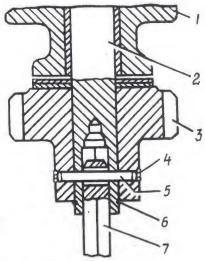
OIL PUMP AND IGNITION DISTRIBUTOR DRIVE 1 - drive body; 2 - ignition distributor drive shaft; 3 - driven gear; 4 - spring ring; 5 - safety pin; 6 - lock ring; 7 -
